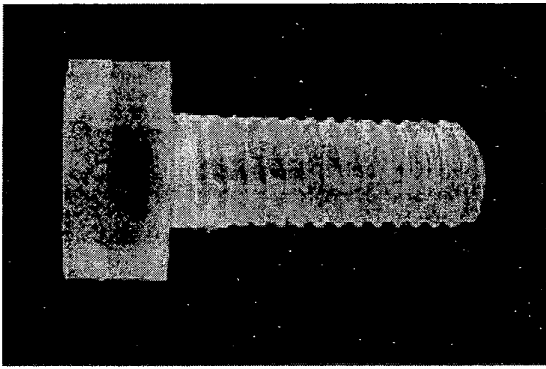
Later developed SMP Screws (M4x10.0mm). The thread-less shaft was post formed in its secondary mould. Also tested on the various stated mobile phones. Mean disassembly time was ≈ 8 seconds. Best-achieved disassembly time; 1.5 sec.
